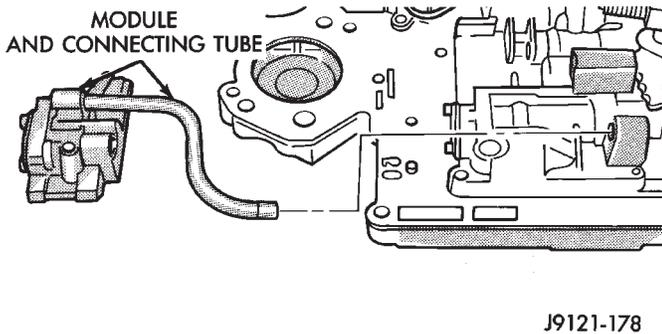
Clutch Module And Connecting Tube Removal/Installation
